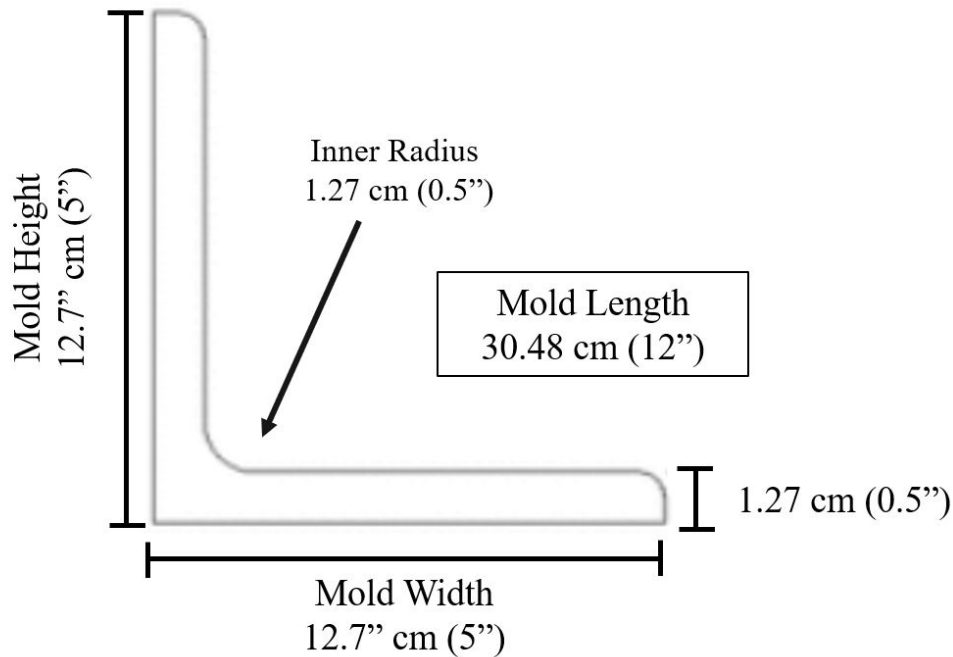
Diagram of L-shape mold dimensions. Image modified from [83].
